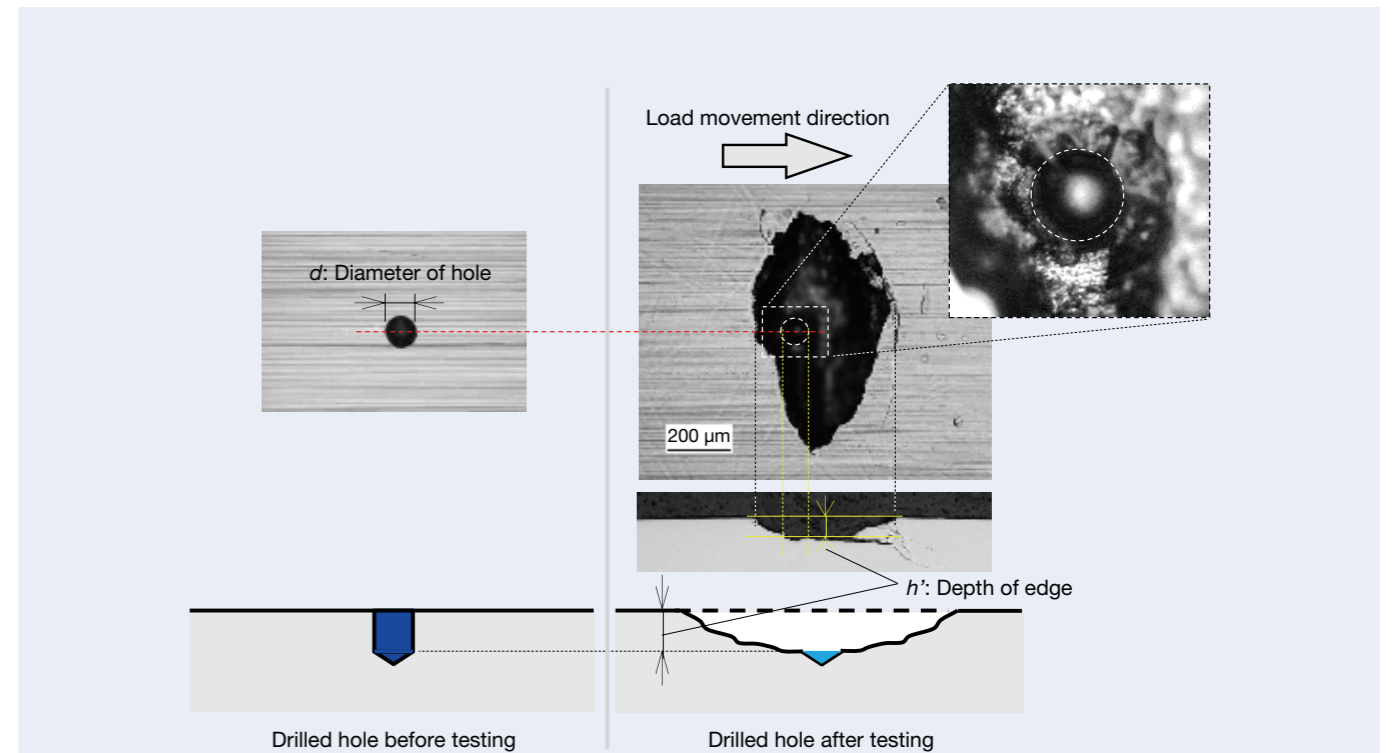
Examples of the observation of cross section after RCF test (inner ring of JIS-6206, $d = 0.100$ mm, $h' = 0.063$ mm, $q_{max} = 3.0$ GPa, $N_f = 2.8 \times 10^7$). The fatigue crack was initiated from the edge of drilled hole.
